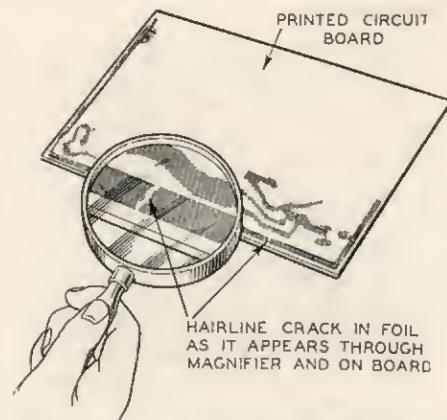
USING A MAGNIFYING GLASS TO EXAMINE PRINTED WIRING FOR HAIR-LINE CRACKS.
